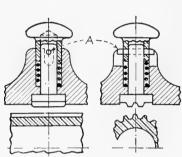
In this design, the pin A engaging in the slot prevents the plunger from turning. This detent is used as a temporary gear lock which is engaged for loosening a drawback rod through the gear.
